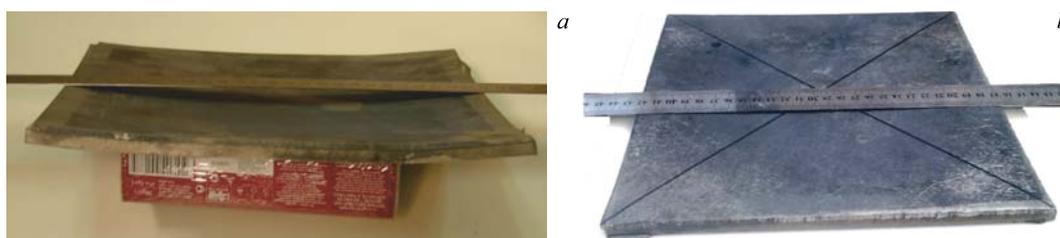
View of the billet after explosion welding: a) before planishing; b) after planishing
